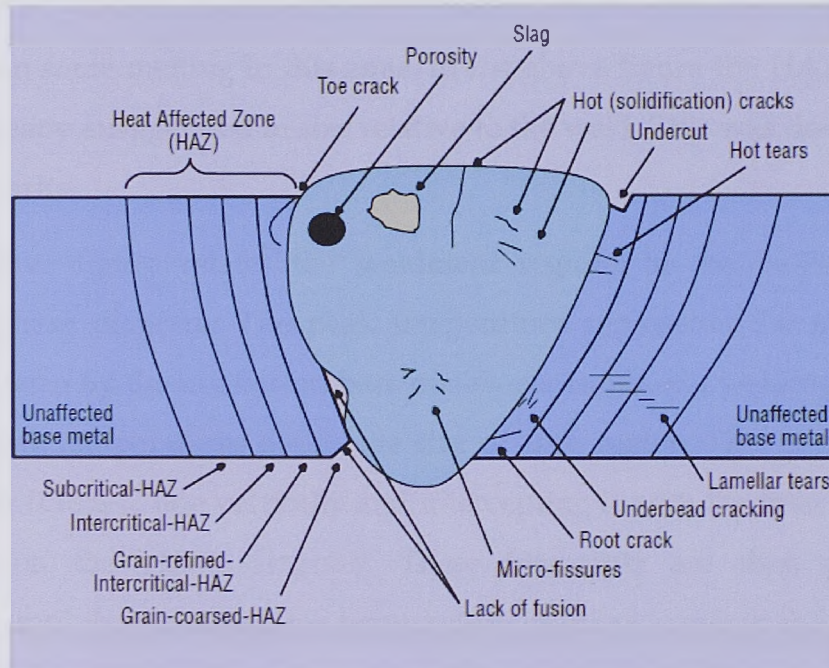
Drawing showing the various regions of the HAZ in a single-pass weld and the possible defects. [61]
